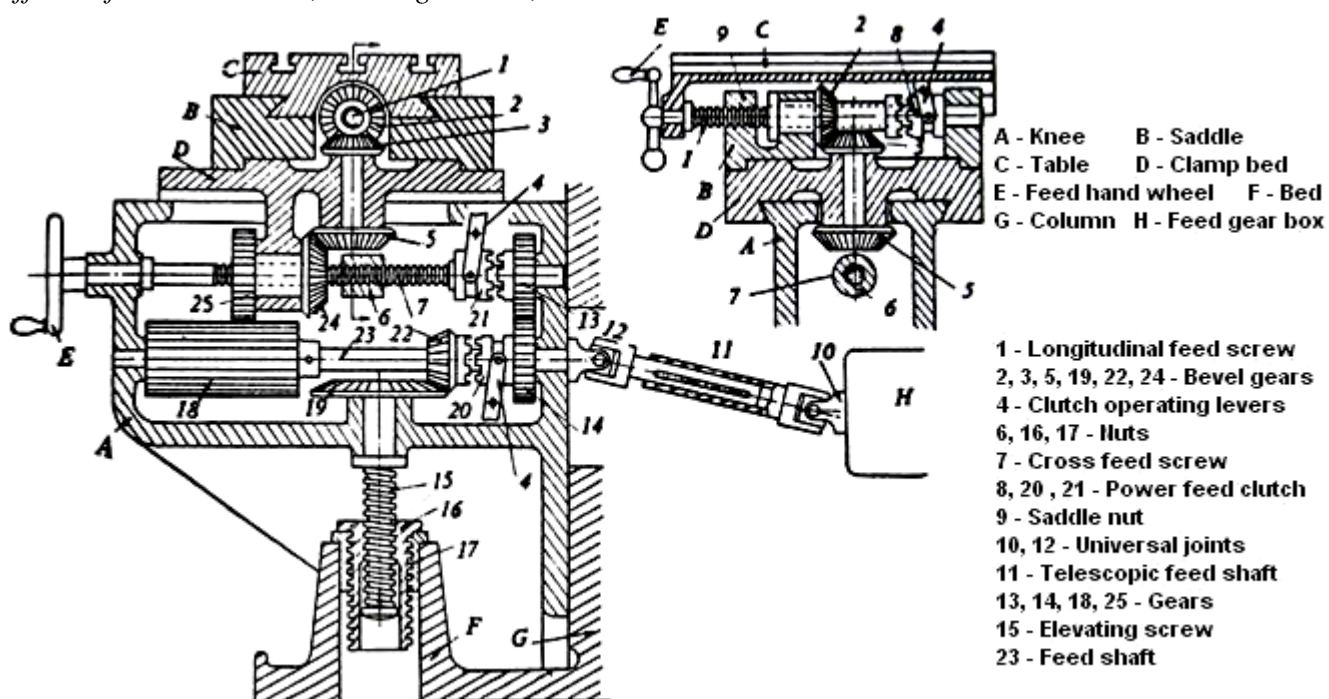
Power feed mechanism of a column and knee type milling machine
